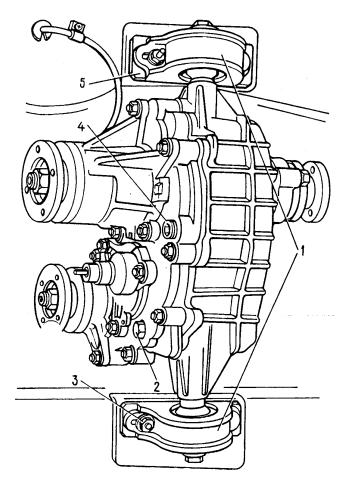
Transfer Case Mounting: 1 - transfer case mount brackets; 2 - filler plug; 3 - mount bracket nut; 4 - drain plug; 5 - adjusting shims
